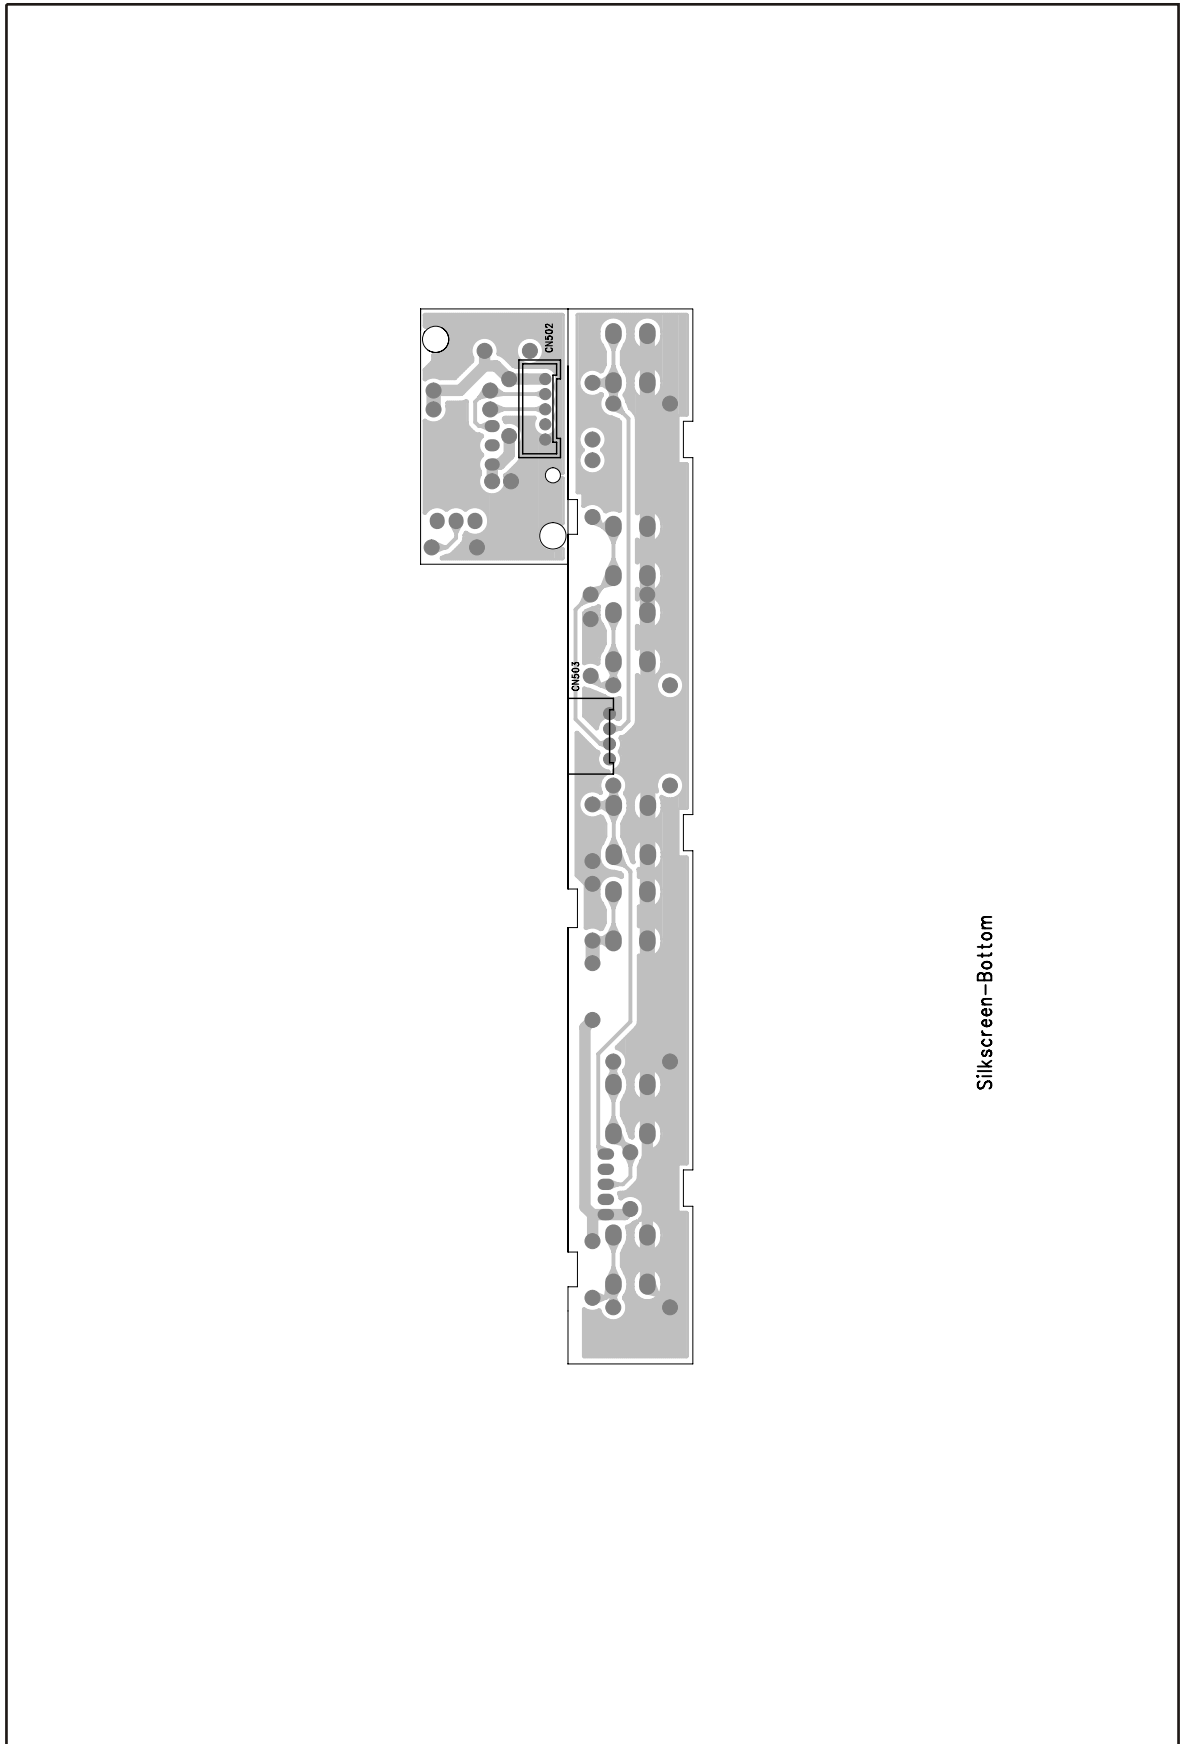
CONTROL KEYS Board(BOTTOM Side)
